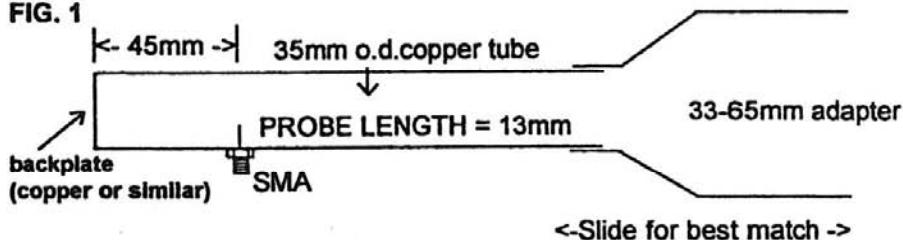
illustrates the main constructional features of the horn feed. The 35-63mm adapter is the largest that is obtainable going directly from 35mm. To use a larger aperture it would be necessary to employ several adapters "in series" and this would make the whole assembly too heavy. The total length of tubing can be any convenient length but the distance from probe to backplate must be as specified.
